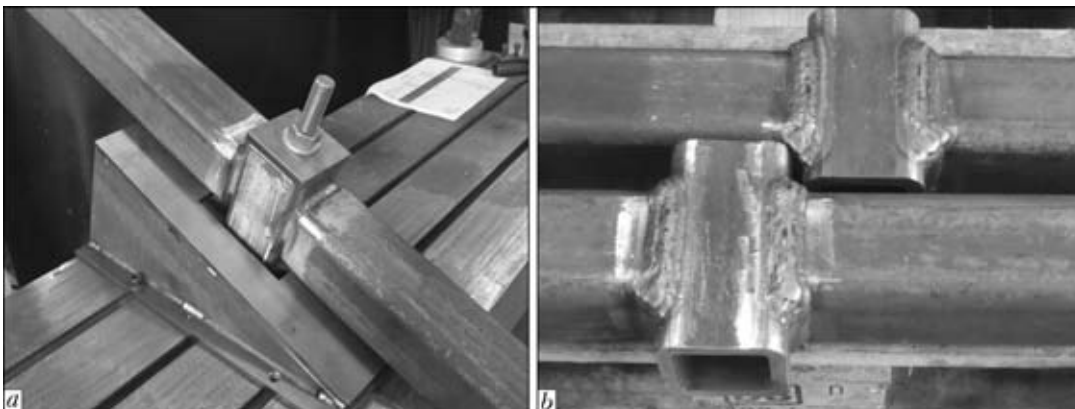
Welded assemblies with fillet (a) and butt (b) welds
